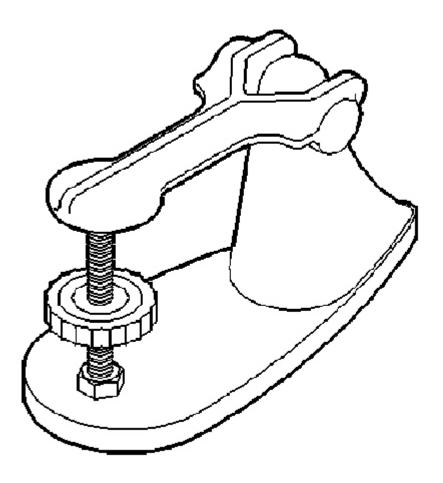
Valve Spring Tester C-647 Courtesy of CHRYSLER LLC
